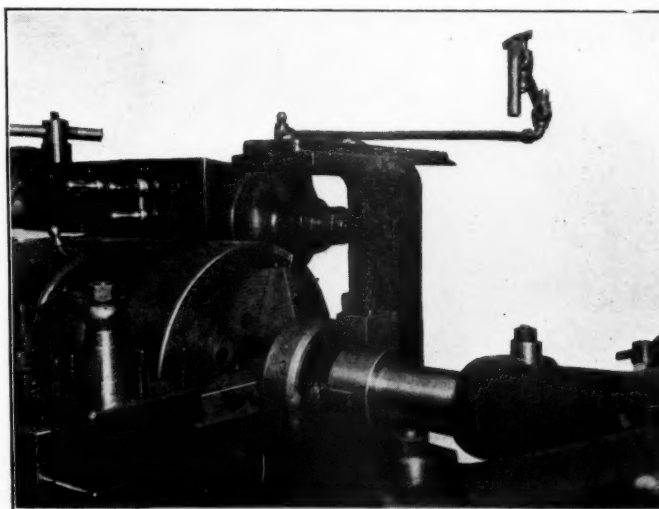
Outline of Tool Set Up on Combination Turret Lathe
